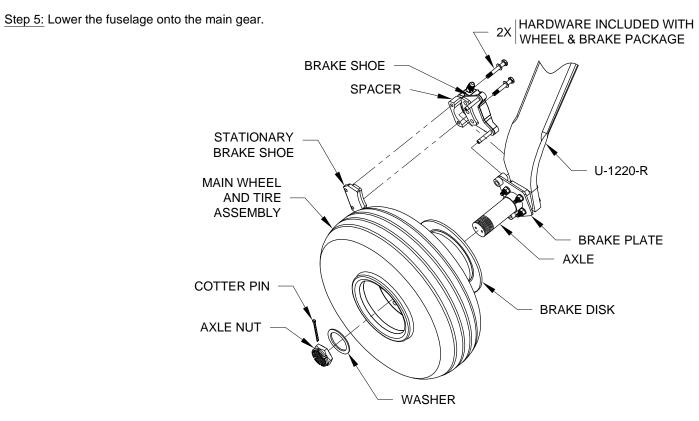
ATTACHING THE WHEELS AND BRAKES
